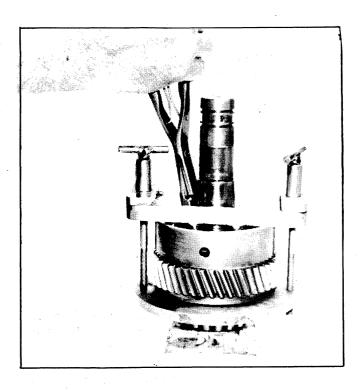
Compressing Clutch Piston Return Spring and Removing External Retaining Snap Ring.
